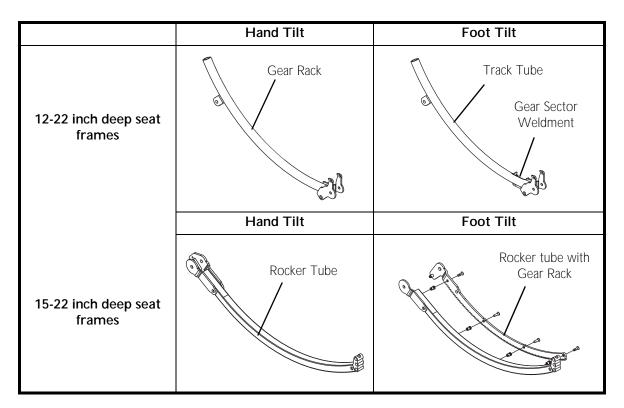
Available Gear Rack, Track Tube and Rocker Tubes
